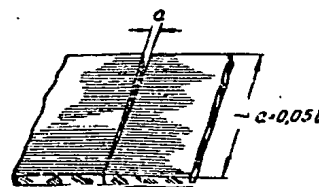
Correct gap width for beginning the butt-welding of sheets
